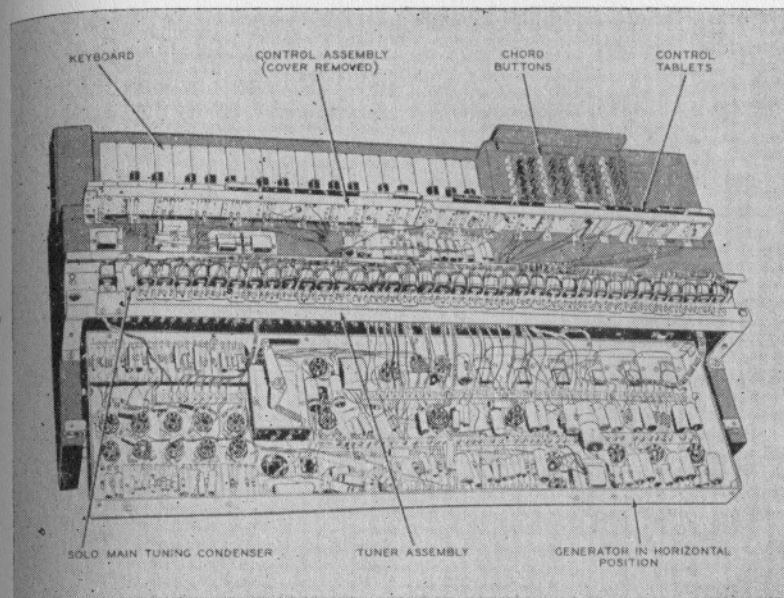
Generator, Tuner Assembly, and Control Assembly Exposed
